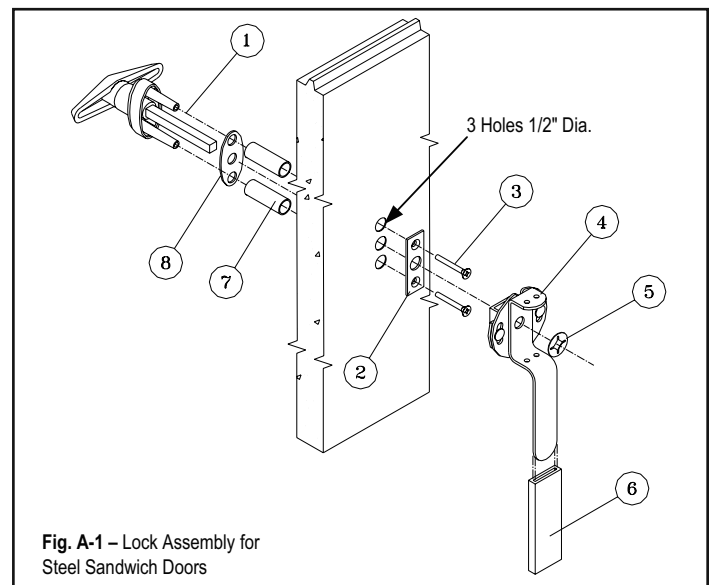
Lock Assembly for Steel Sandwich Doors
